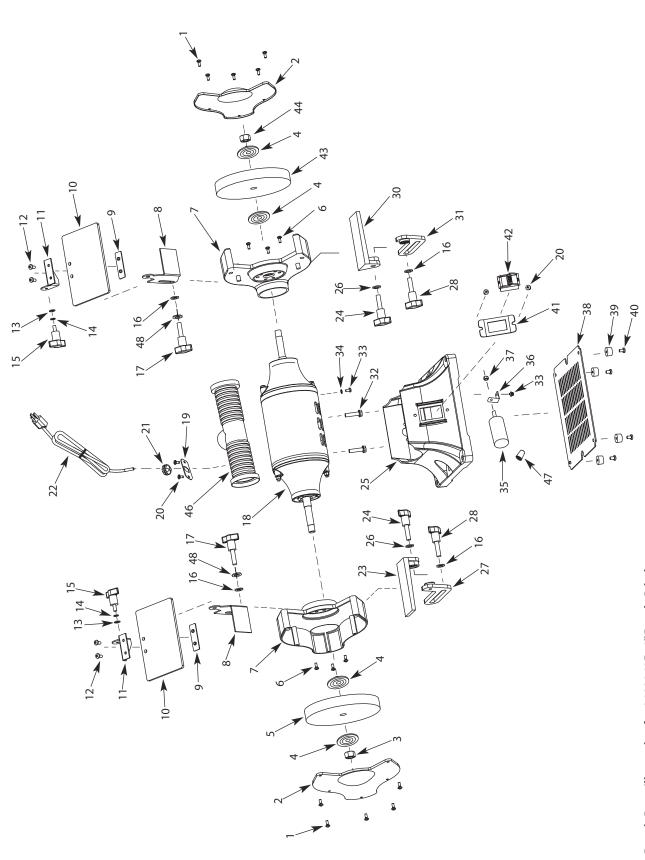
Repair Parts Illustration for 9682062D, 6" Bench Grinder
